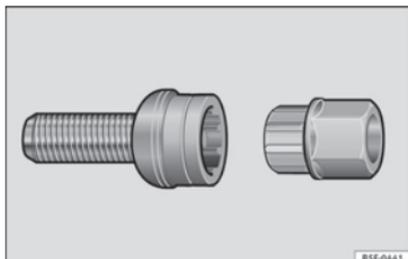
Anti-theft wheel bolt with cap and adapter.
